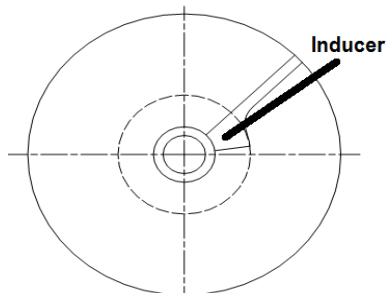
Frontal view of the impeller. Only a blade is depicted.
